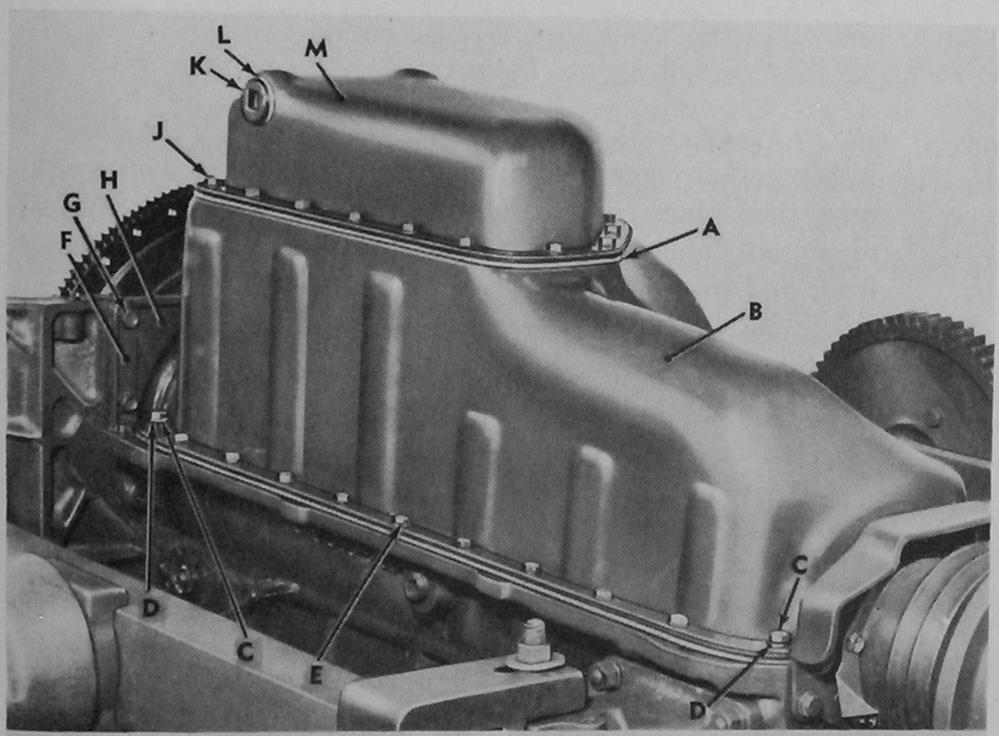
Engine oil pan gaskets installed—engine assembly 8726920 shown.
